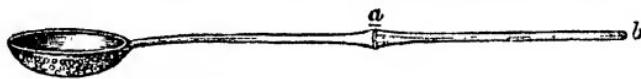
CRYSTALLISING LADLE EMPLOYED IN THE PATTINSON PROCESS.
